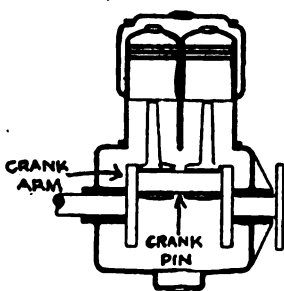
A two cylinder vertical engine with a 360 degree crank shaft; both connecting rods on one crank pin.
